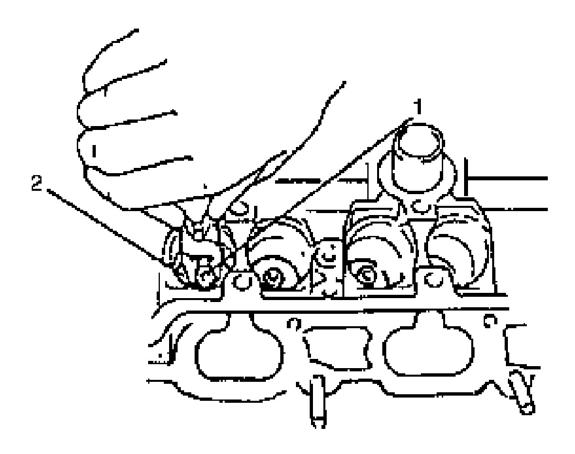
Removing Valve Stem Seal Courtesy of SUZUKI OF AMERICA CORP.
